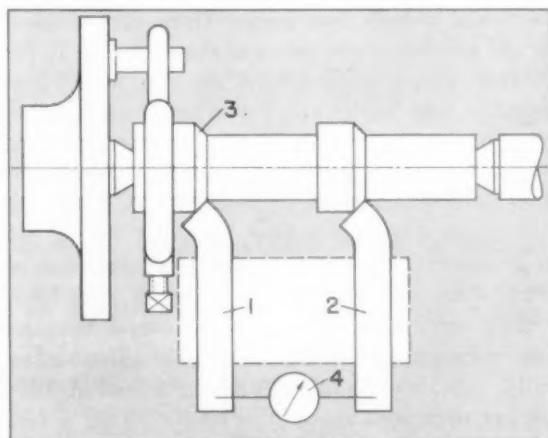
Schematic view of two-tool thermocouple "Thermoduo." After Reichel. 1 and 2, tools (carbide and HSS); 3, workpiece; 4, potentiometer.
